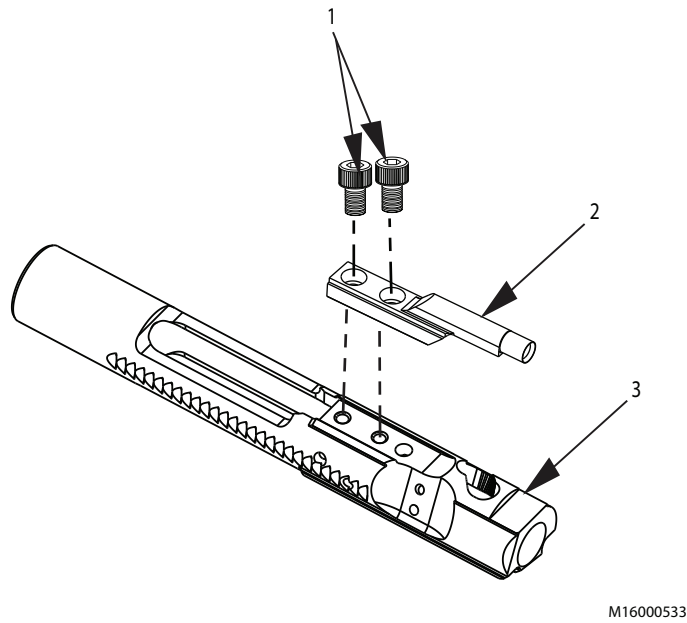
KEY AND BOLT CARRIER ASSEMBLY 8448505
